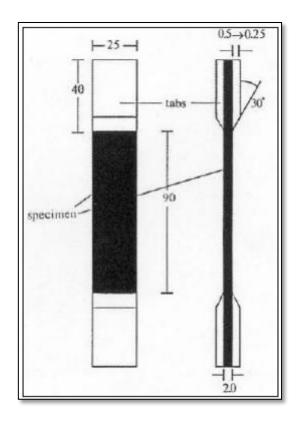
Typical tensile composite test specimen dimensions (all dimensions in mm) (Mechanical Testing of Composites, 2012)
